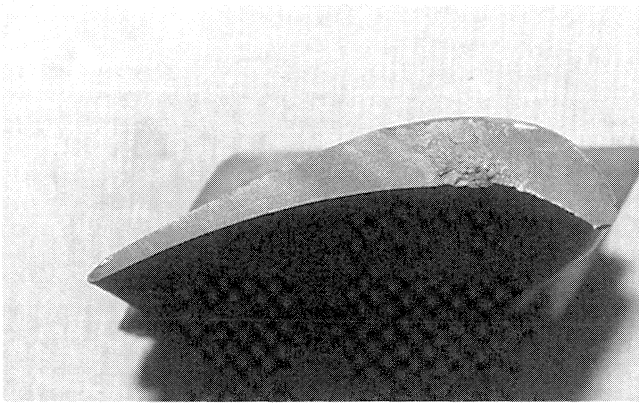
Classic Sixth Stage Fatigue Fracture Surface. (An oxide progressive coloration was observed.)
